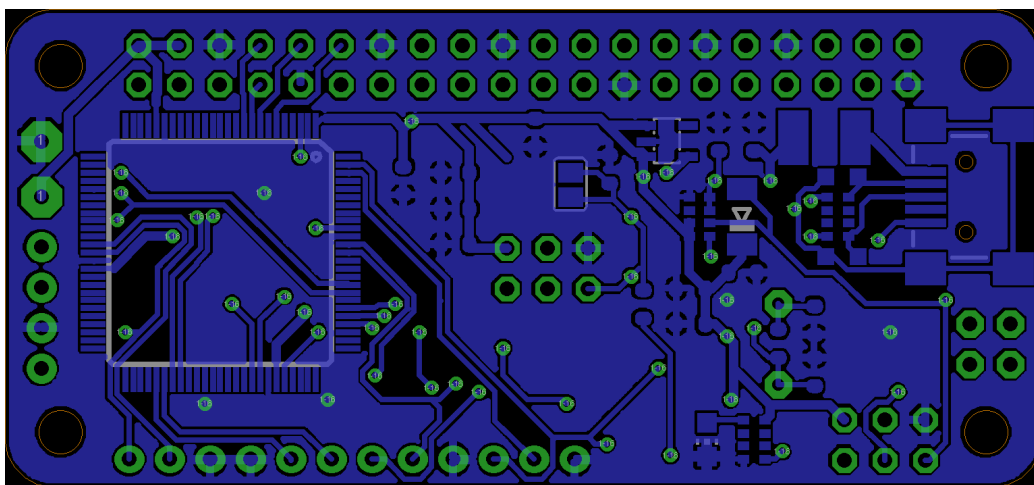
Daughter Board PCB Bottom Layer Revision 1
